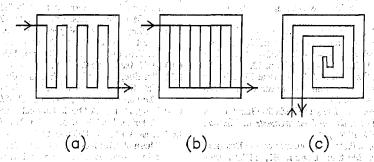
Some Layouts of the Liquid Paths in Heating or Cooling Plates Salado mada hodinda
